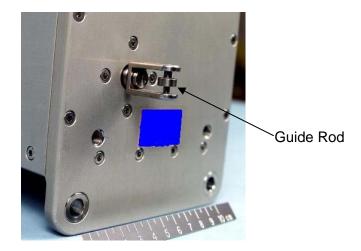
Guide Rod on CEVIS Ergometer at fully retracted position.
